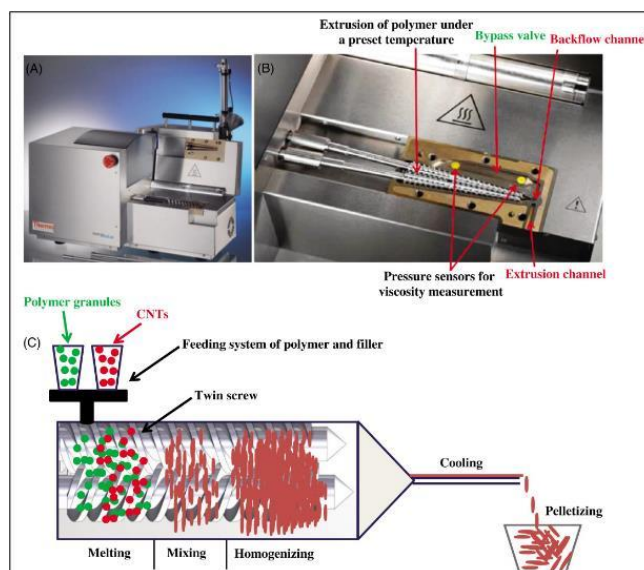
(A) Twin screw extruder, (B) view of micro-compounder showing different valves and channels, and (C) twin-screw extruder for melt mixing of CNTs & polymer matrix [102]
